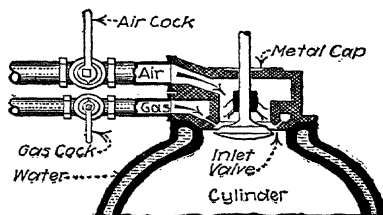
Showing method of mixing fuel and air in a gas engine.
